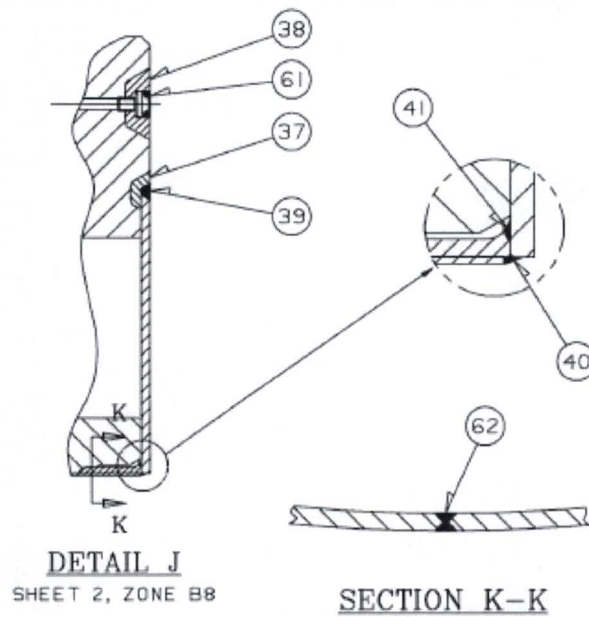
Flywheel weld joints identified on AP1000 weld map (Reference 5).
